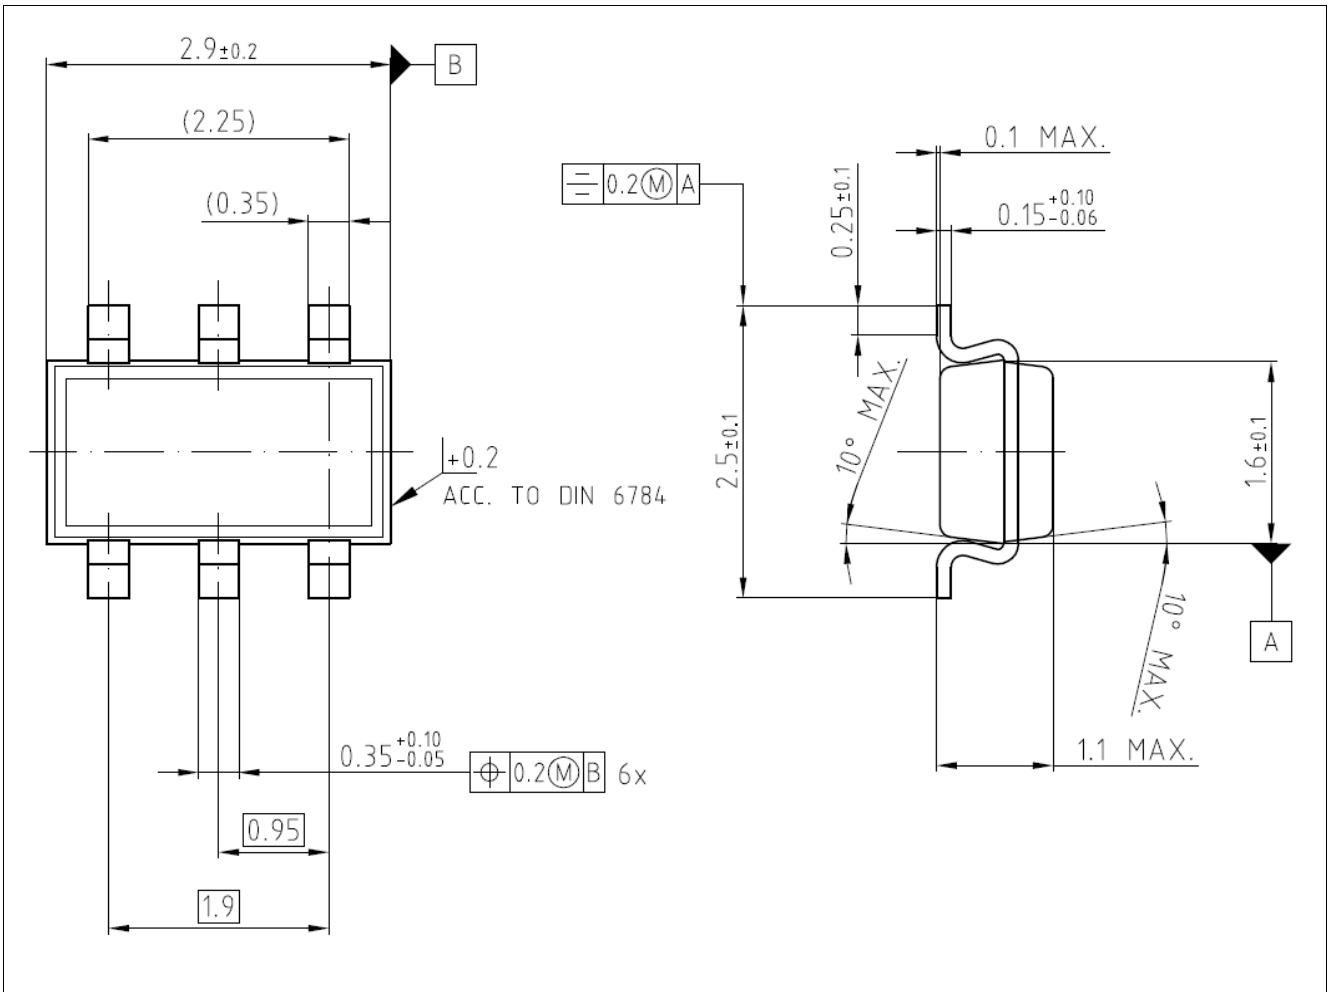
PG-TSOP6-6-5 Package Outline (All dimensions in mm)
